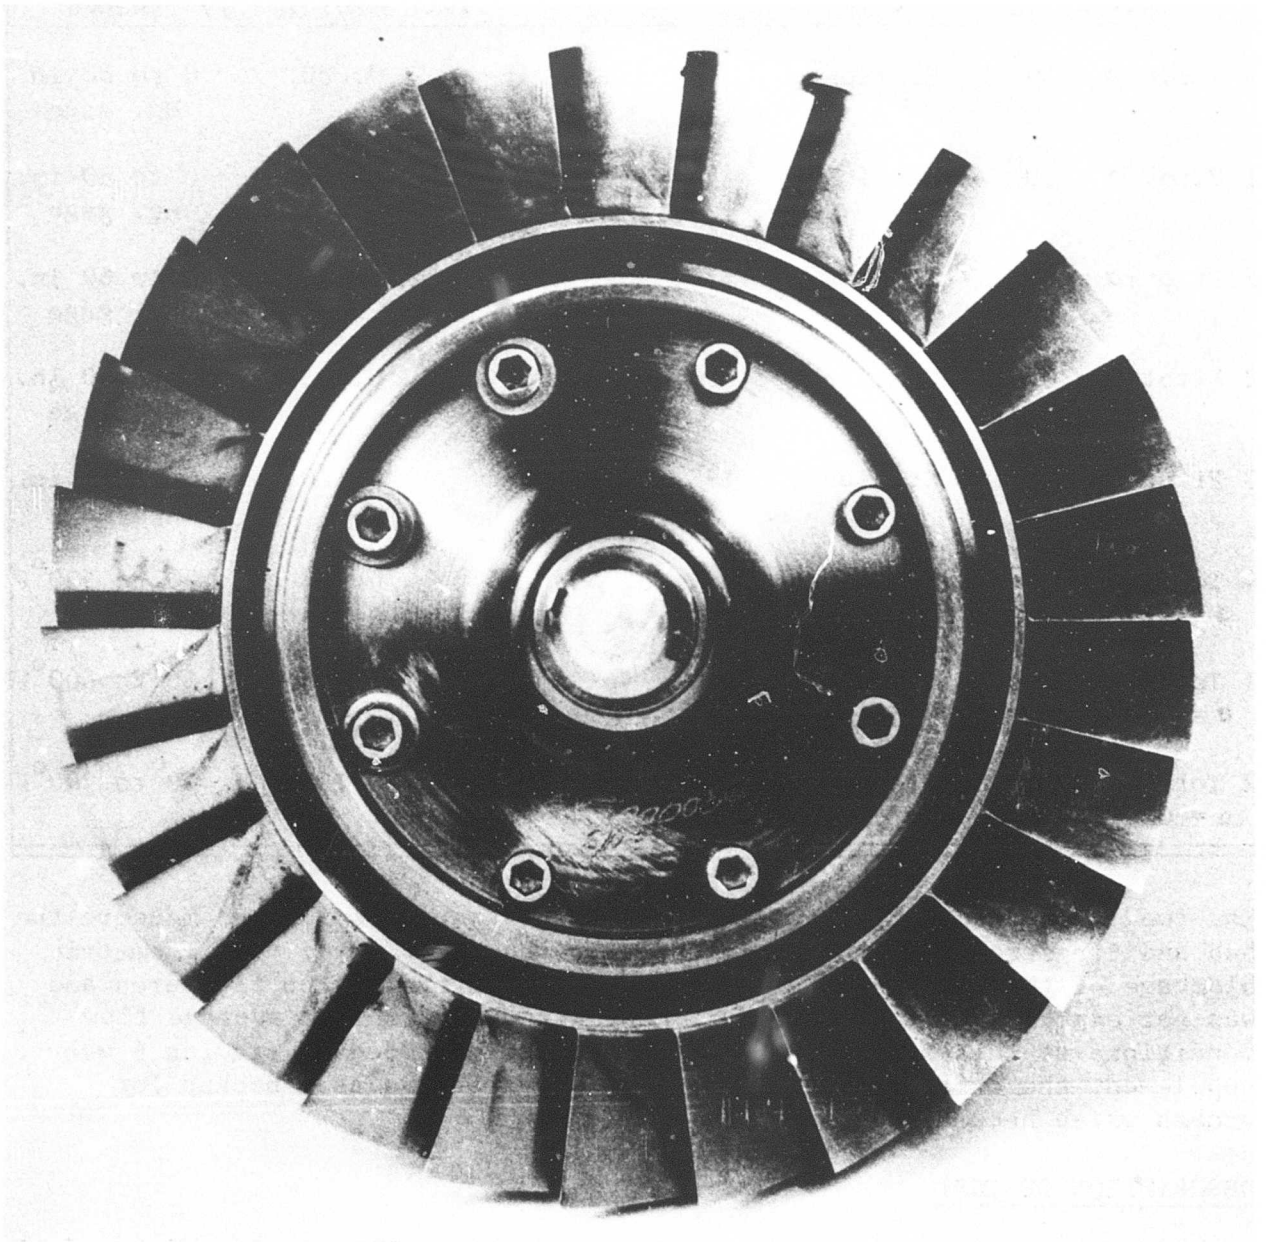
Builds 7, 8, and 9 - Post-Test Photo of Compressor Rotor Indicating Nicks on Leading Edge of Blades.
